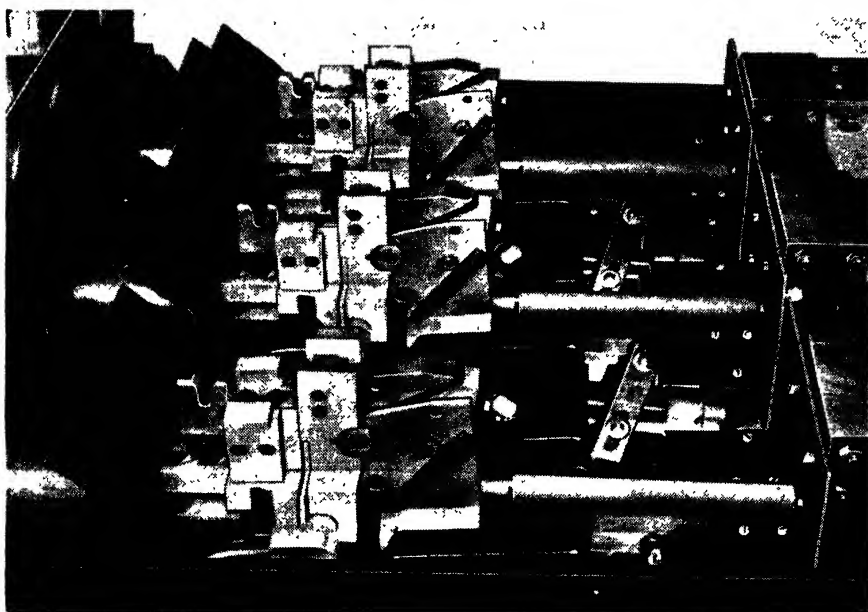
Contact system in closed position, with arc chutes removed. (The English Electric Co. Ltd.).
